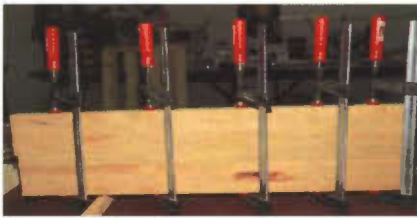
Clamping all the rough-cut legs together during gluing can defeat some of the bow that is found in your material.
